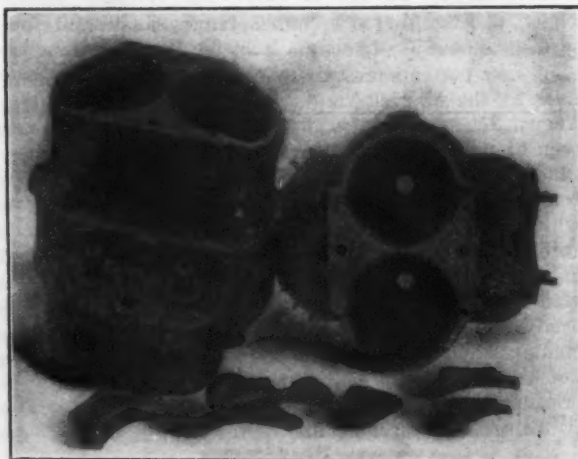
Cylinders with Broken Flanges Before Repairing.
